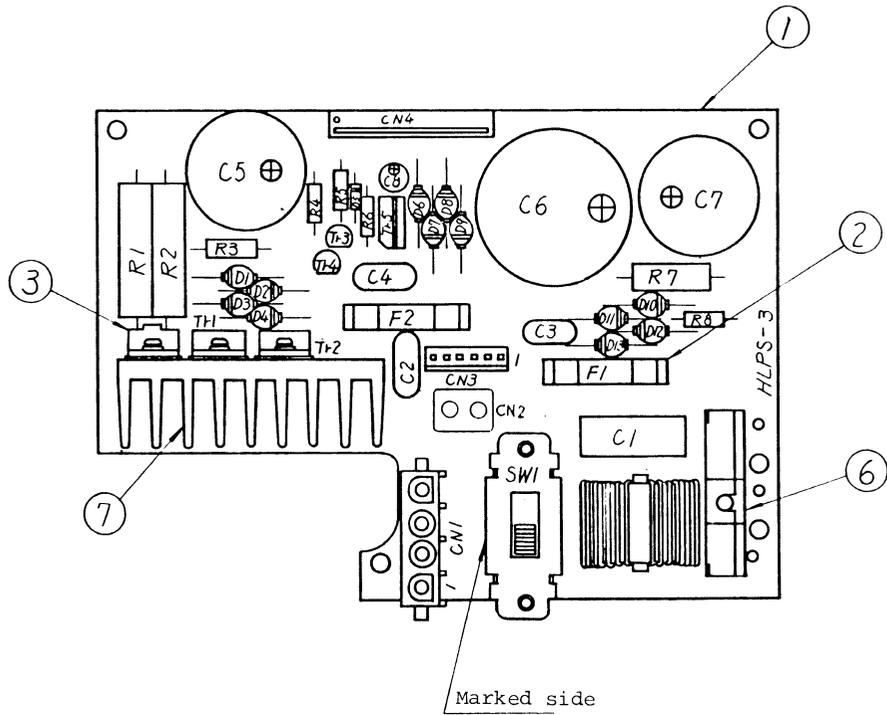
HLPS-2 Circuit Board Assembly (LY-43361-2) (for USA) 1/2
